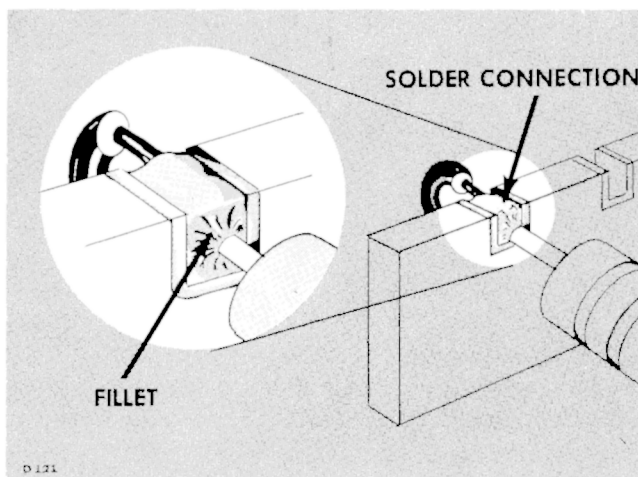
A slight fillet of solder is formed around the wire when heat is applied correctly.
